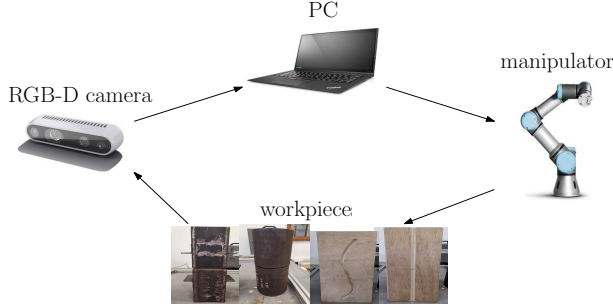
Workflow of the proposed robot system: (1) the RGB-D camera captures surface point cloud of workpieces. (2) the welding groove detection algorithm locates the welding groove region in the input point cloud. (3) the trajectory planning method processes the groove point set and outputs a 3D welding trajectory. (4) the manipulator automatically executes the welding motion while tracking the generated trajectory.
